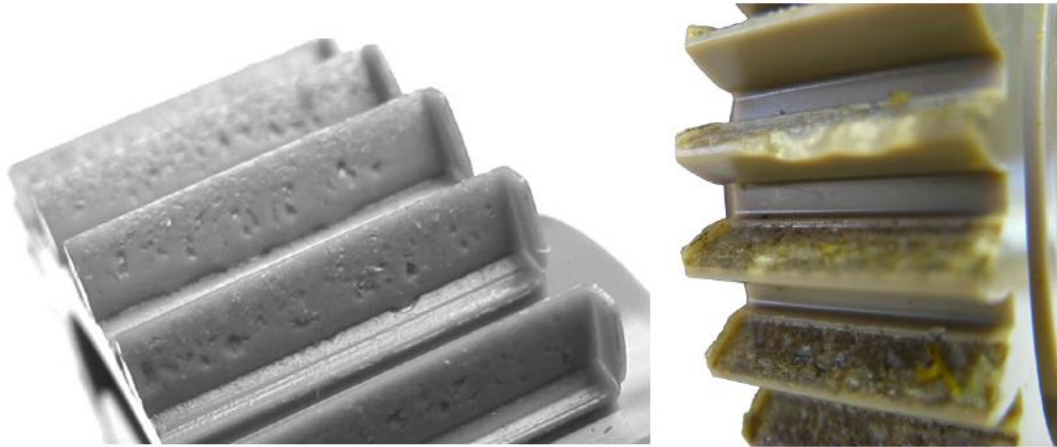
Severe pitting when run in lubricant under high loads, a) PEEK gear, b) PA 6/6 gear [14]
